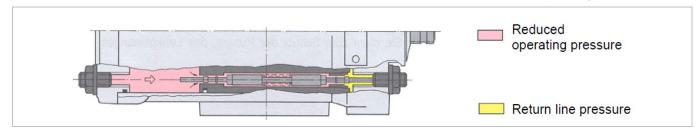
Piston displacement to the right. Right-hand valve pin open. Oil pressure greatly reduced.
